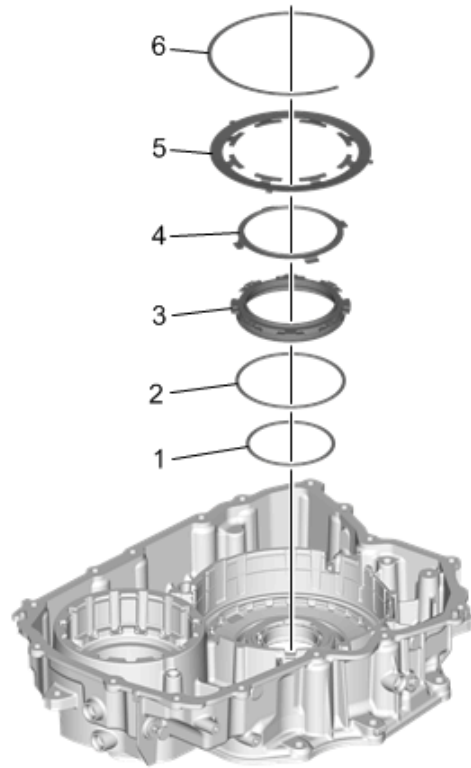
Automatic Transmission Torque Dampener Bypass Clutch Piston
